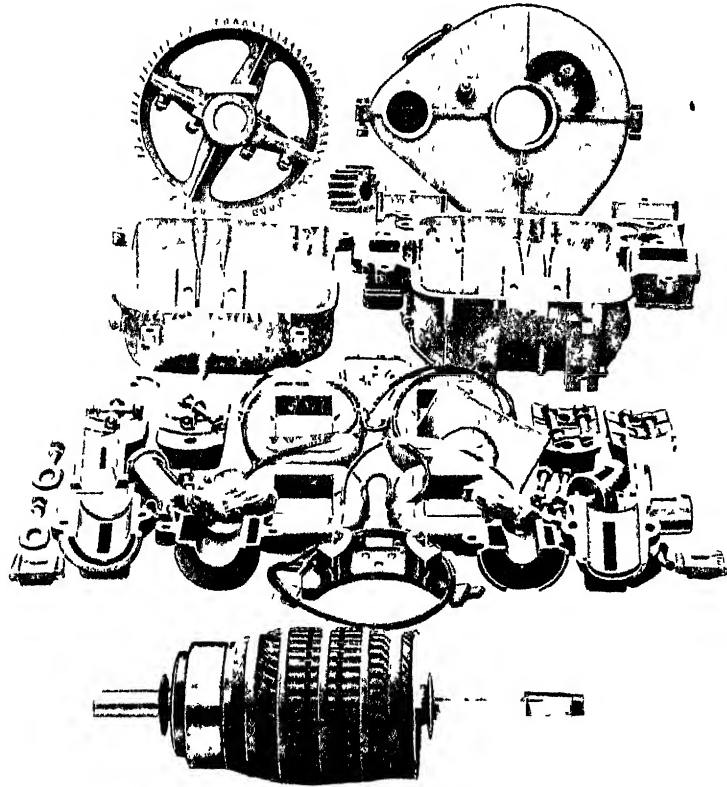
Parts of No. 25 Type A Motor before Assembling (Dick, Kerr, & Co.)
